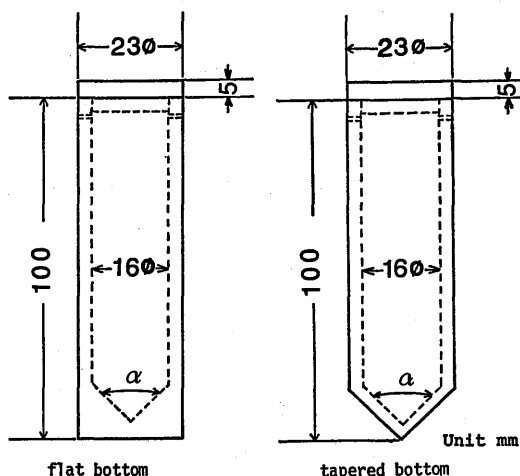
Dimensions of flat bottom crucible and tapered bottom crucible
